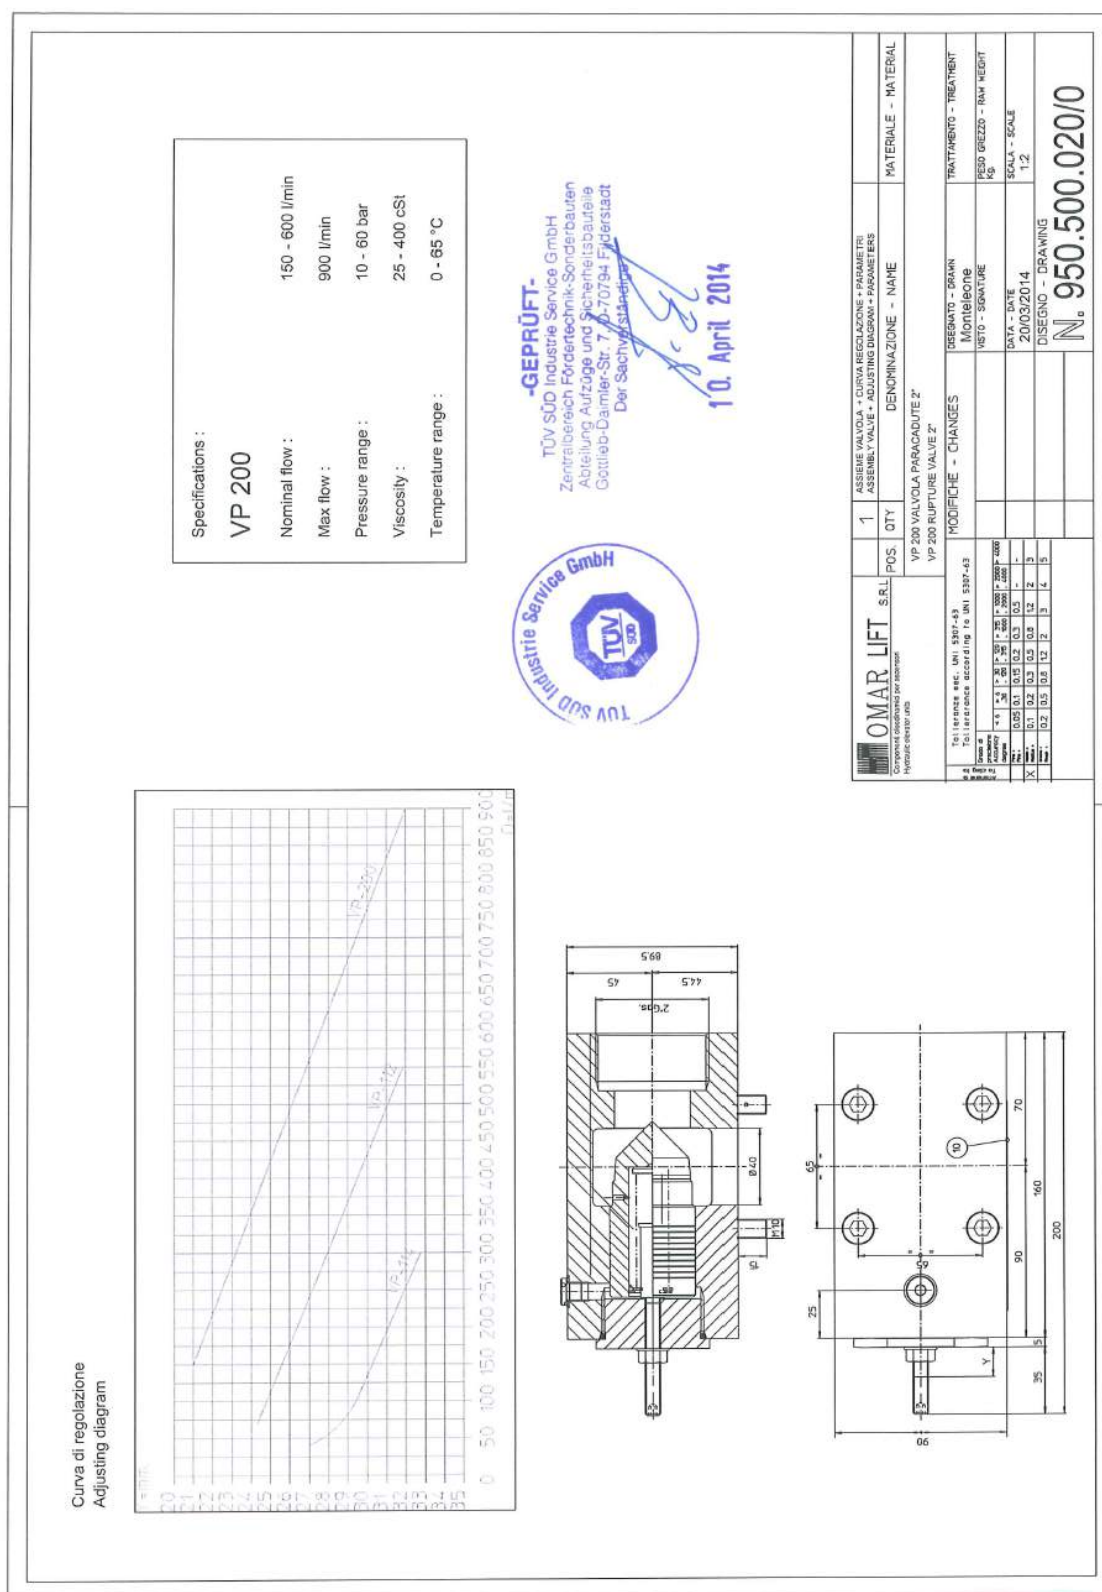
Example of rupture valve with Notified Body approval (TÜV SÜD)
